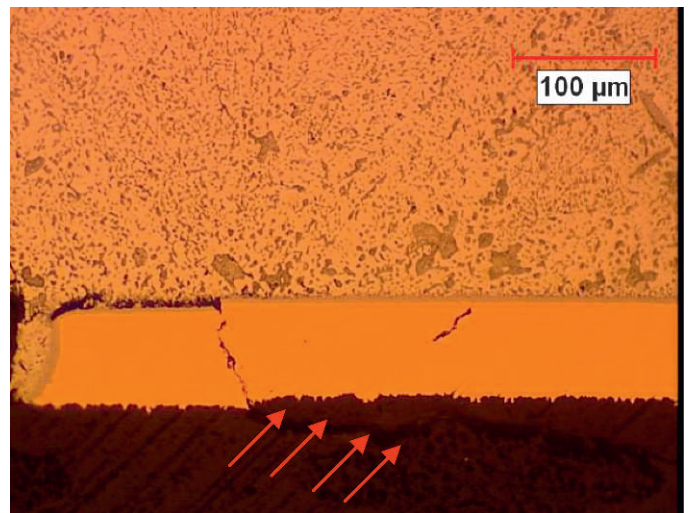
Board side failure (with pad crater) of BGA with SnPb solder on ENEPIG finish (170°C T_g board).
